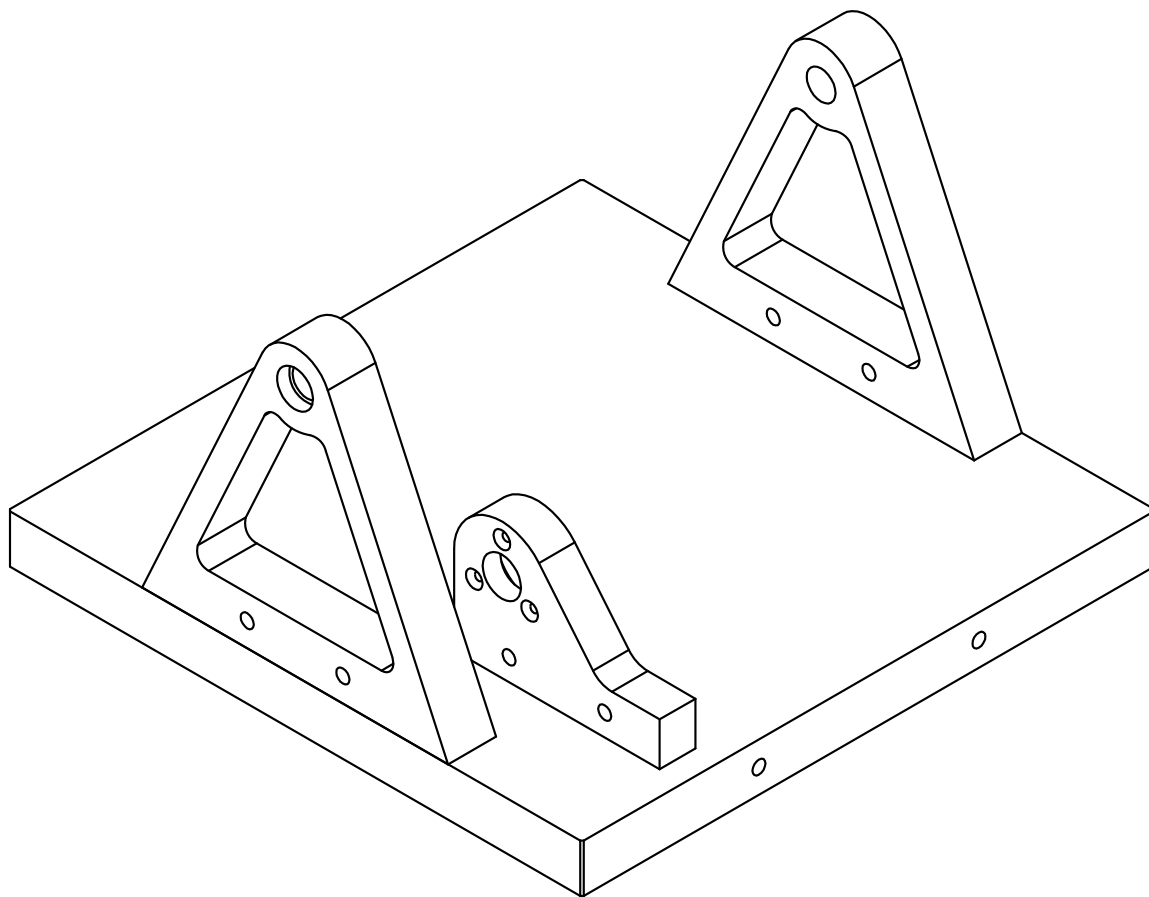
Joystick base assembly including Base plate, X-stage motor mount, and two X-stage bearing risers.
